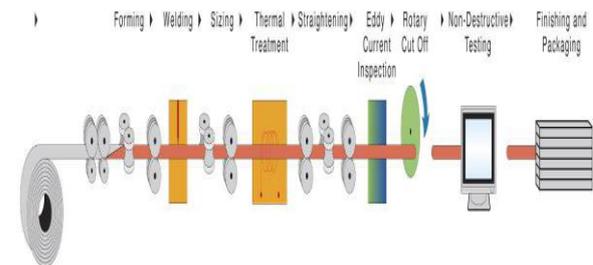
Valtimet Titanium And Stainless Steel Welded Tubing Process
